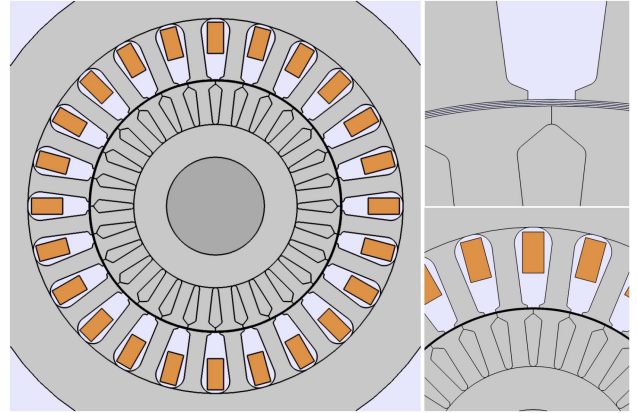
Motor under investigation – Rotor and stator lamination and constructive details (right).
